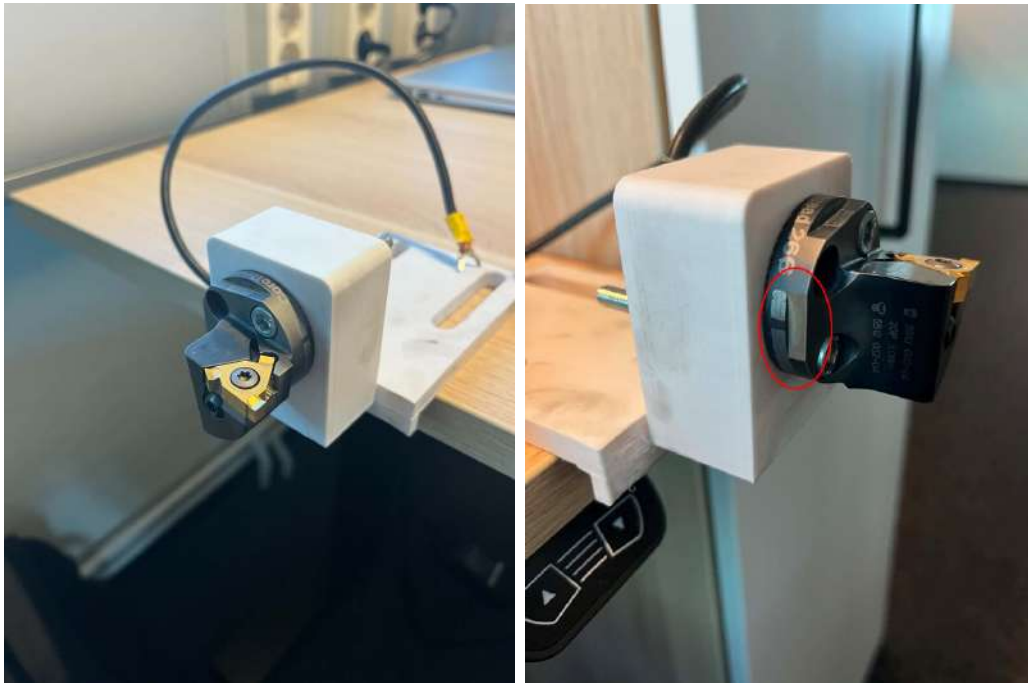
Cutting fixture made out of PLA. The fabricated cut on the tool holder is marked in red.
